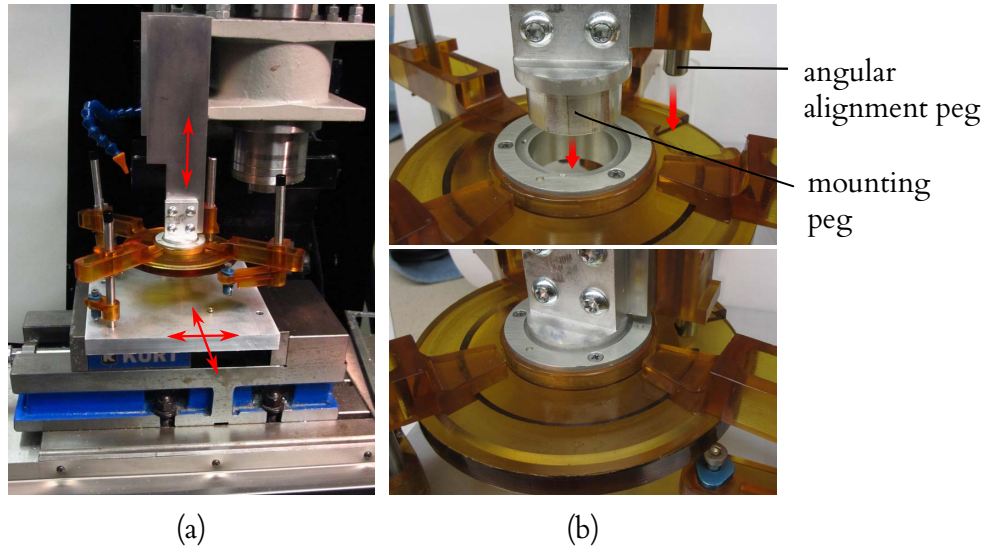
(a) The CNC milling machine used to adjust the Freeze Frame during experiments. The red arrows show the three degrees of freedom of this machine. Attachment posts are embedded in the plate below the Freeze Frame. (b) A cylindrical mounting peg mates with a coupling ring in the circular disc, and a second peg fits into a notch on the disc to constrain the angle of the Freeze Frame during adjustment.
